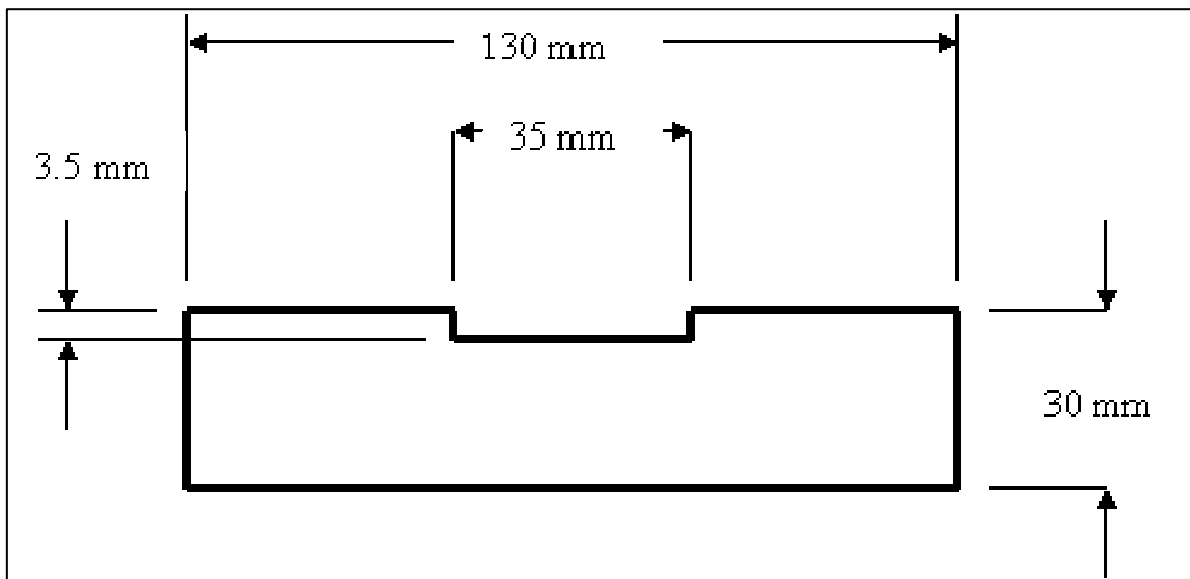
Dimensions of Original FCB Bar Design Used by Pascagoula
